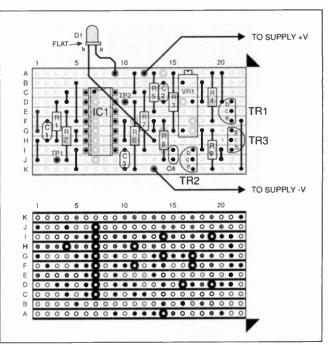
Stripboard component layout, wiring and underside details of breaks required in the copper tracks.
